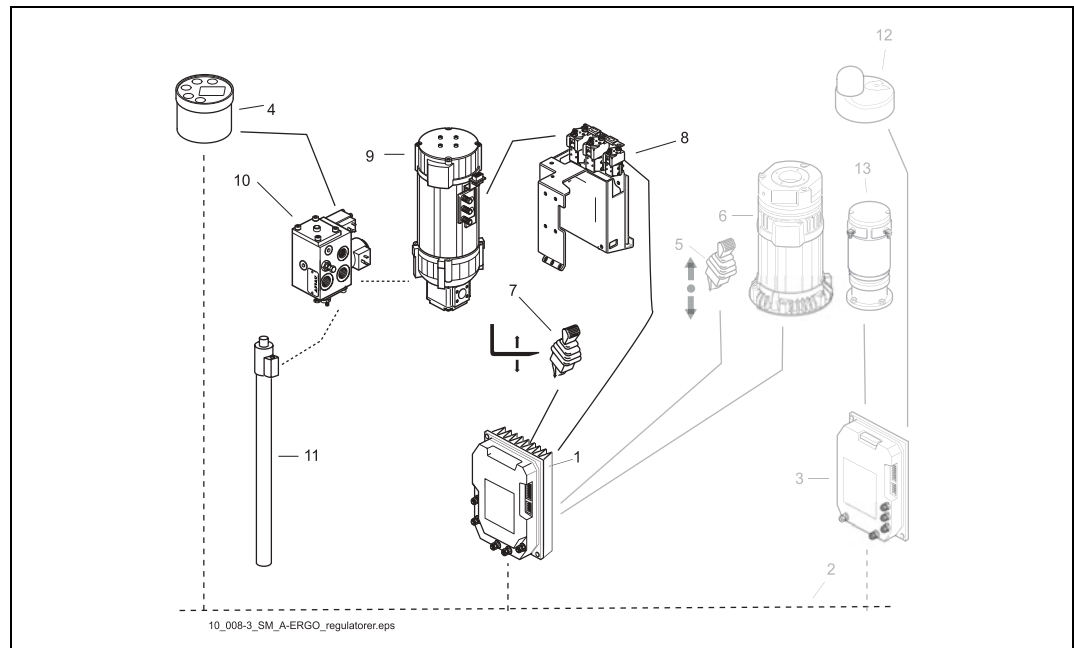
Overview of drive motor regulator, hydraulic pump motor, lift valve and lift cylinder
